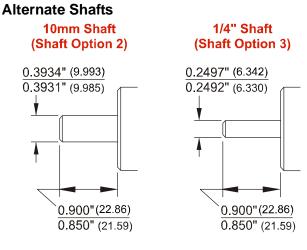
Flange Mount, End Connector, Stainless Steel Body Outline Drawing
